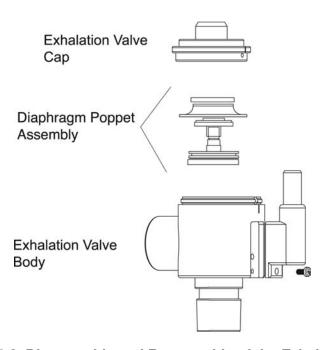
Disassembly and Reassembly of the Exhalation Valve
